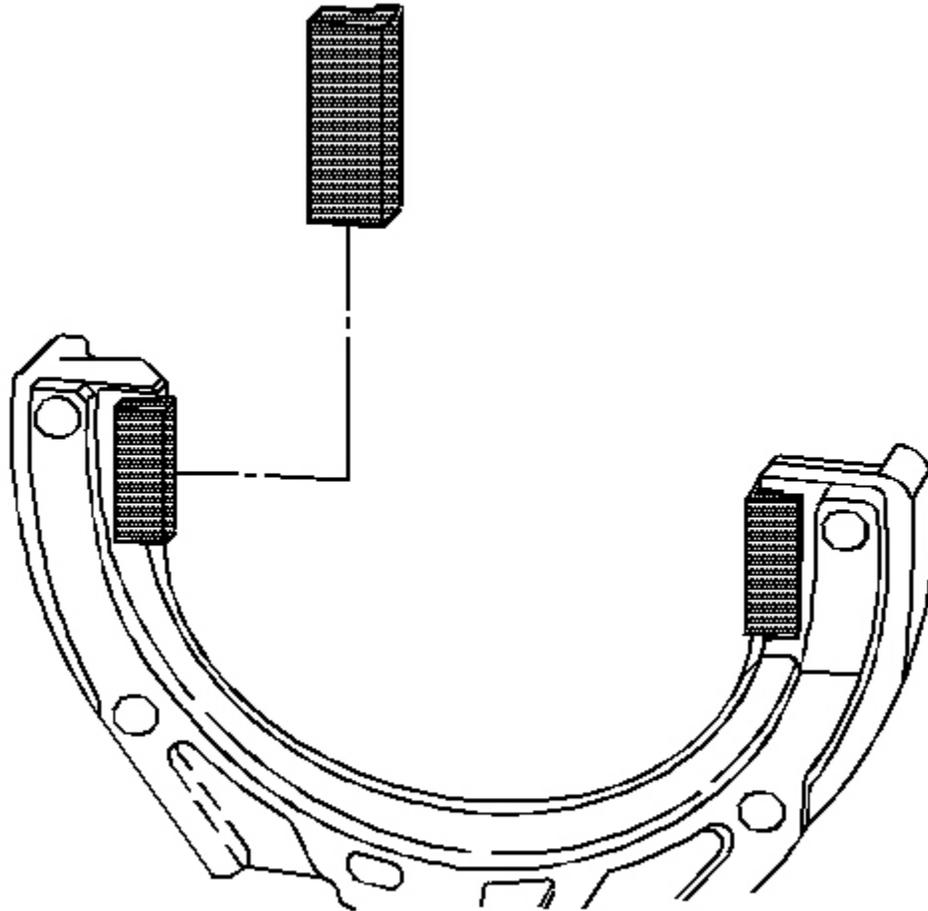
Identifying Inspection Areas On Shift Fork Nylon Inserts
